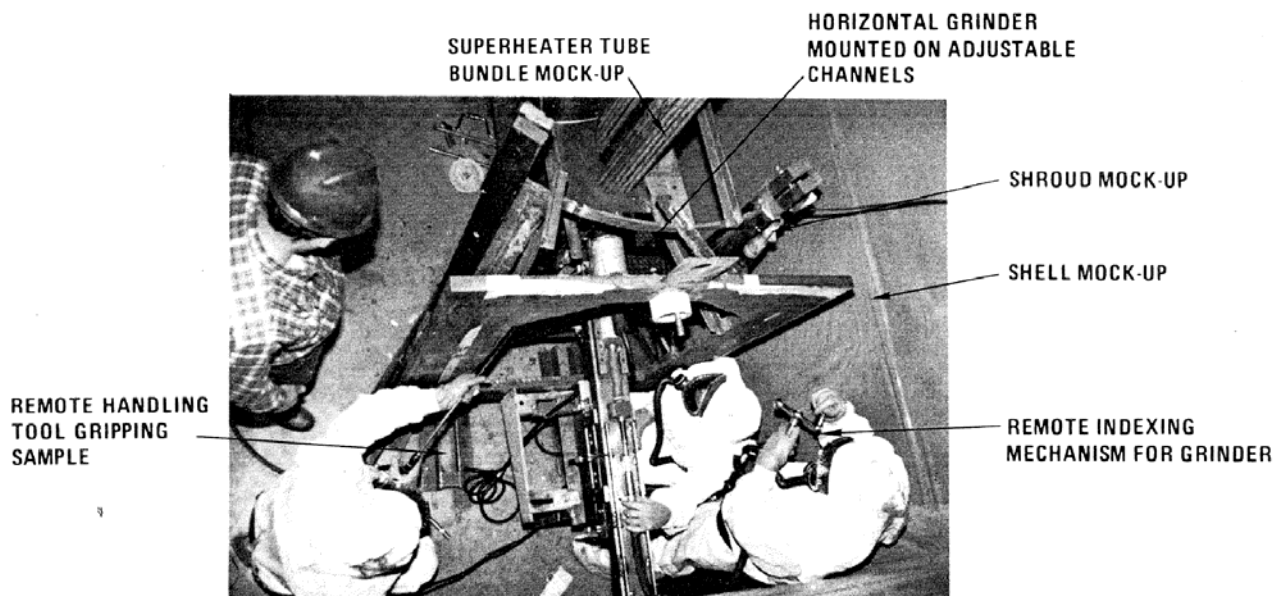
Steam generator tub bundle mock-up showing practice tube sampling.
